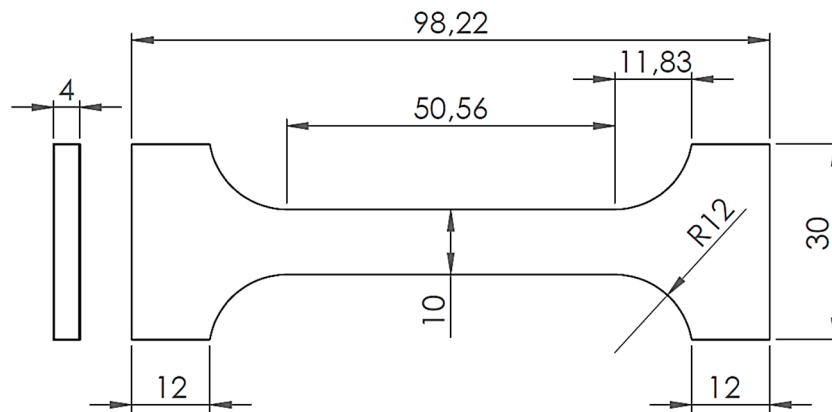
Test piece of solder for static tensile test. Unit: mm.
